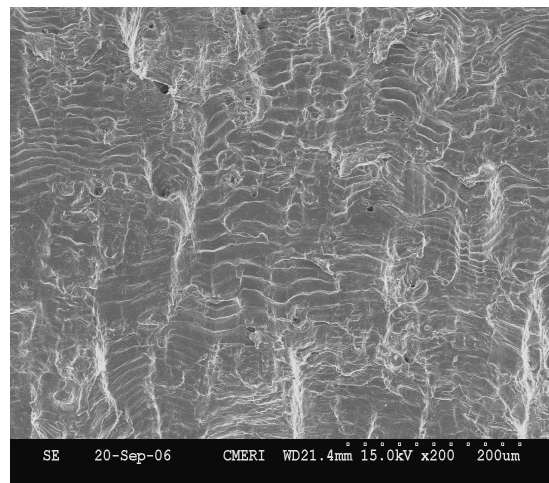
Fracture surface under cyclic loading condition at $R= -0.5$ and $\Delta V=0.1$ mm showing striation marks
